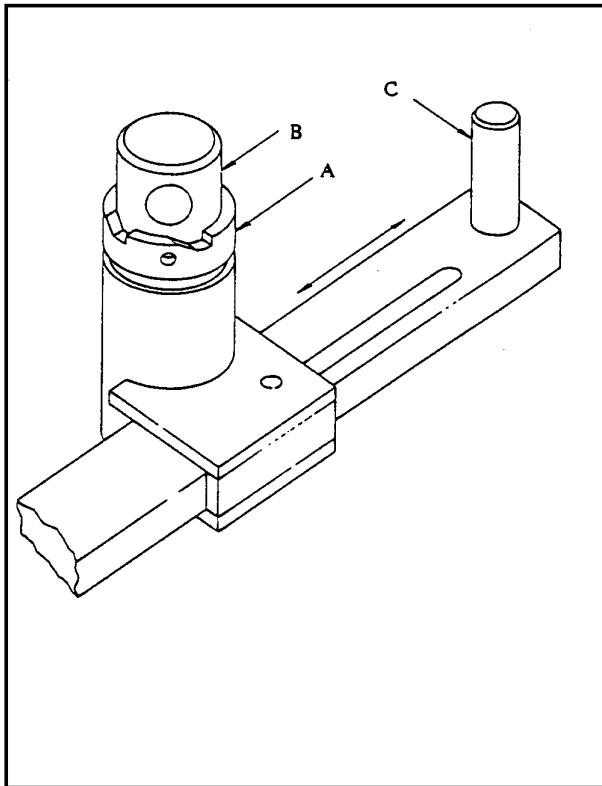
Slide bleed tube (A) over bleed bolt (B) and ensure that bar key (C) slides back & forth easily.
